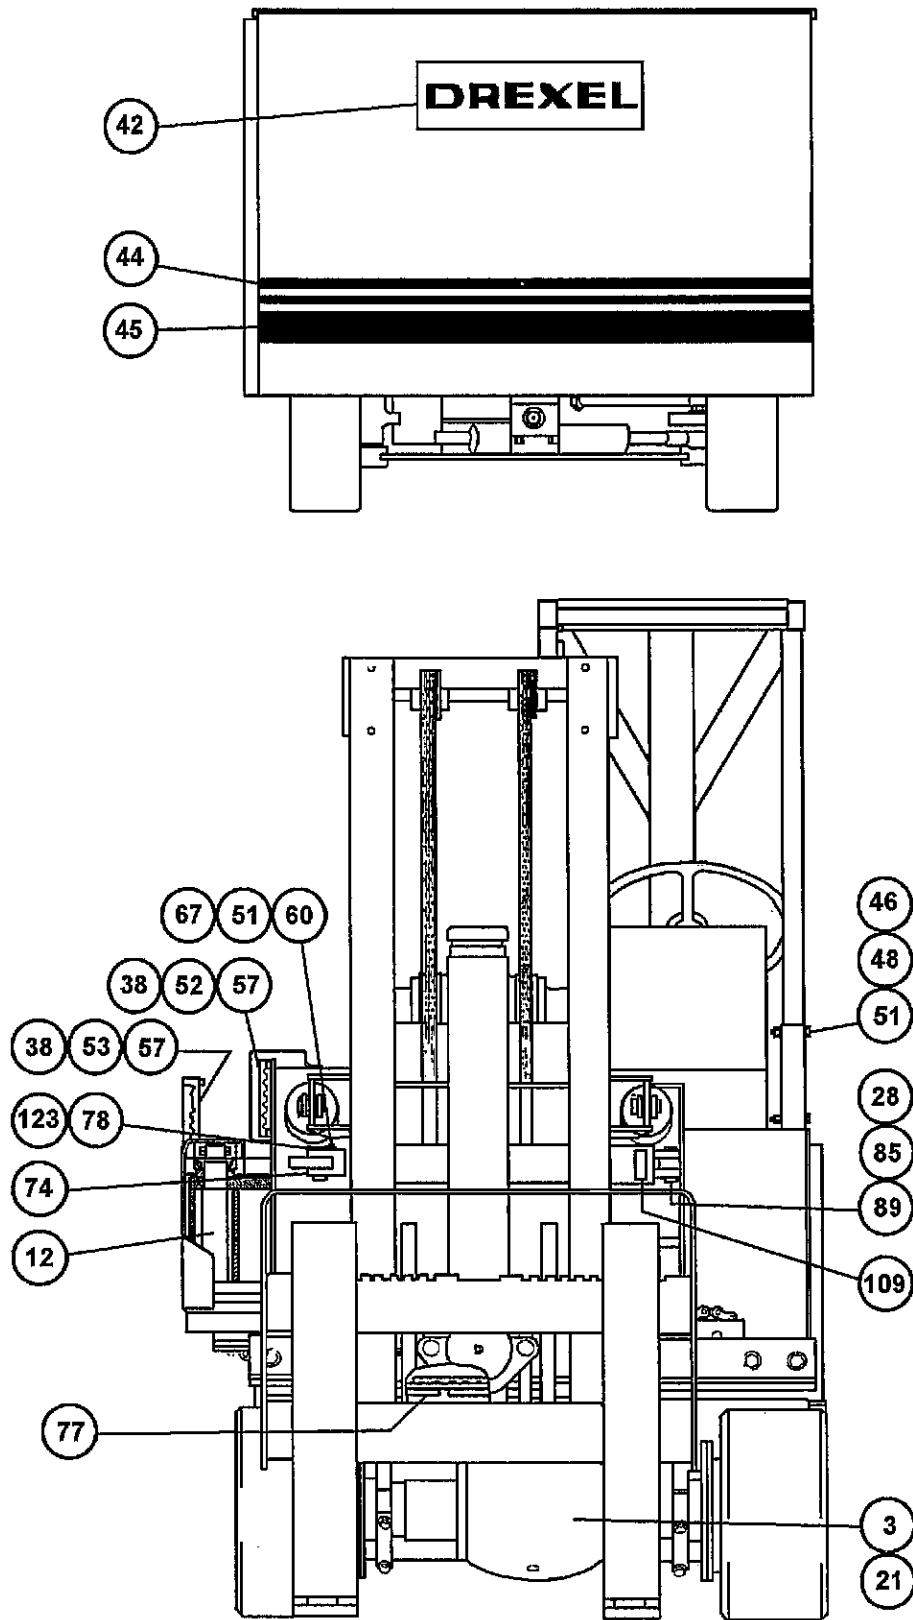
Umbilical Assembly, p/n: 10692-A
